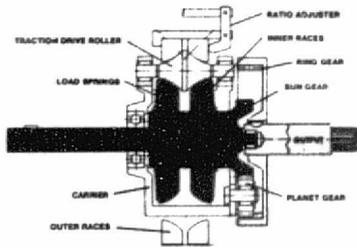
Fafnir bearing division's planetary cone roller traction drive (ref. 23).
